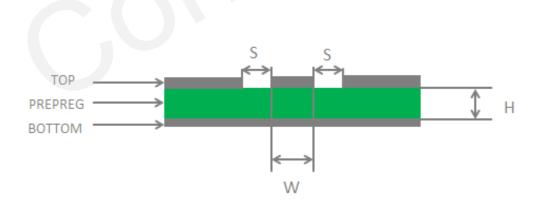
Coplanar Waveguide Line Design on a 2-layer PCB
